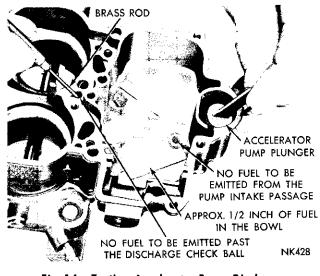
Testing Accelerator Pump Discharge and Inlet Check Balls
